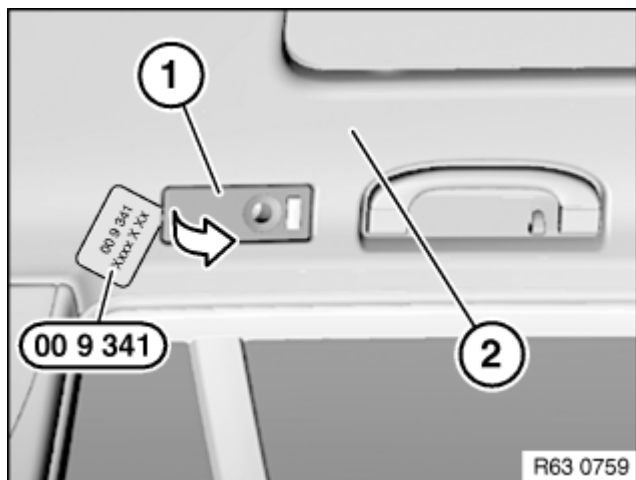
Using Special Tool (00 9 341) To Lever Out Interior Light
